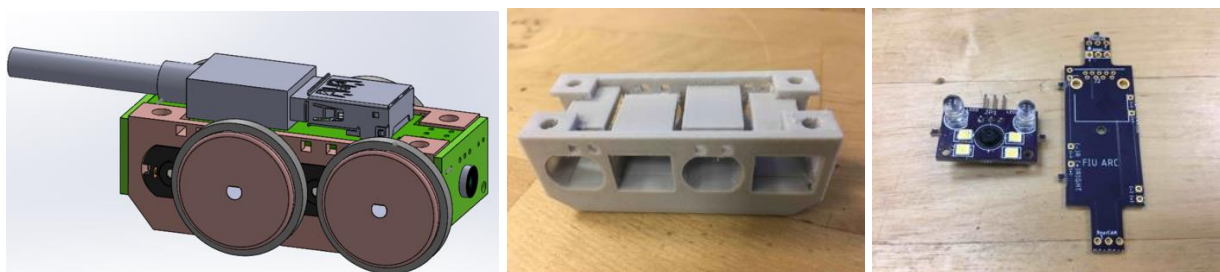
Mini inspection tool with dual camera design and chamfered chassis (left), the 3D printed chassis (middle) and newly fabricated PCB boards (right).
